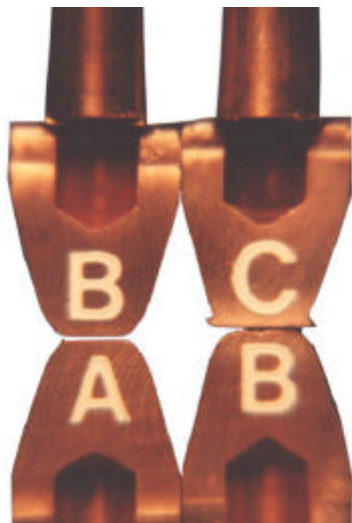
AFTER 8,000 WELDS ON .050 CRS
